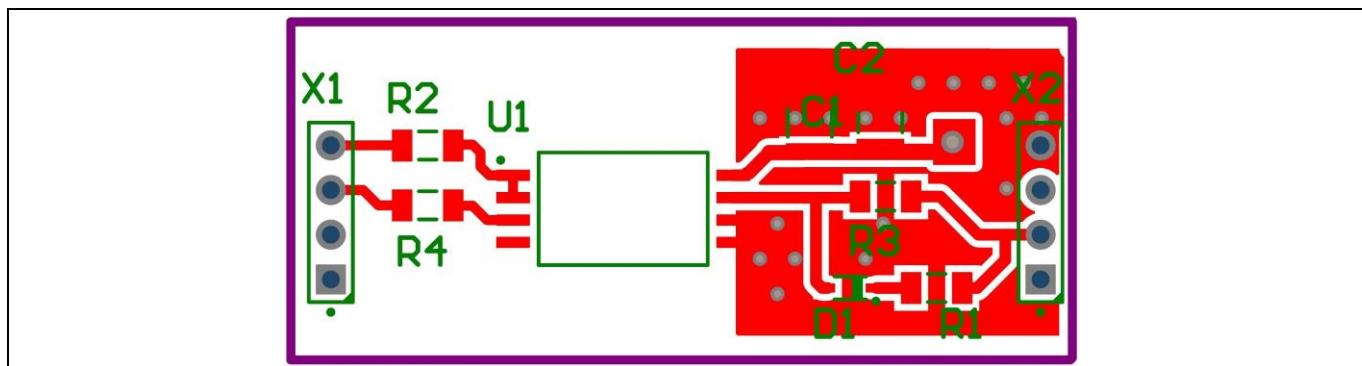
Top view of PCB for gate drive optocoupler design with ACNU-3430
